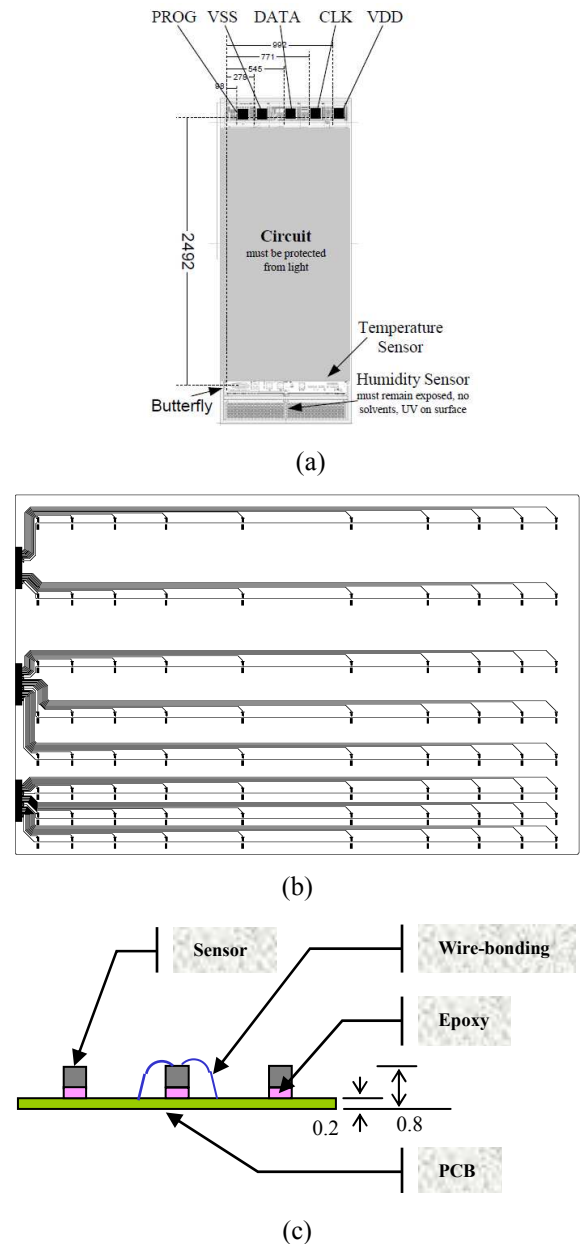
Sensor PCB: (a) sensirion SHT01 bare die sensor (b) PCB schematic (335 by 210mm) (c) sensor wire-bonding schematic
